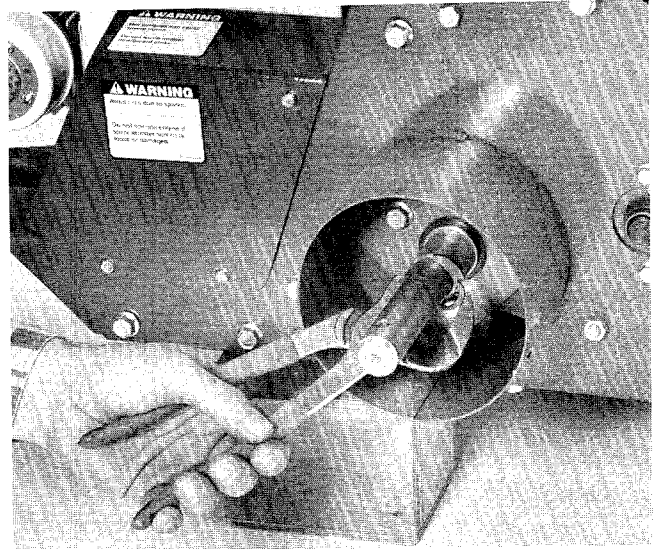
Reinstalling the klip-ring on the axle shaft.
